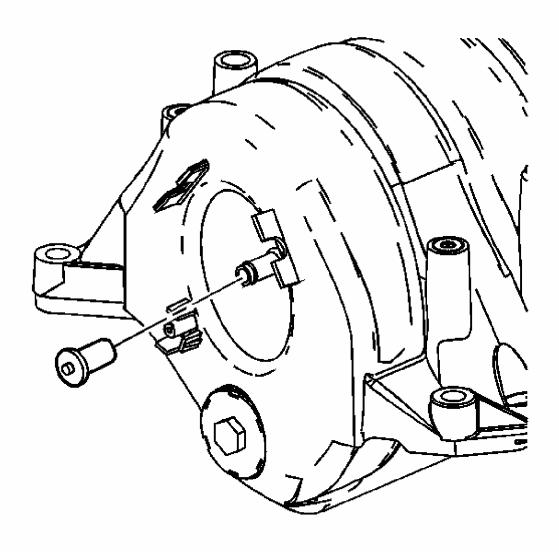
Identifying Intake Manifold Vacuum Cap Courtesy of GENERAL MOTORS CORP.
